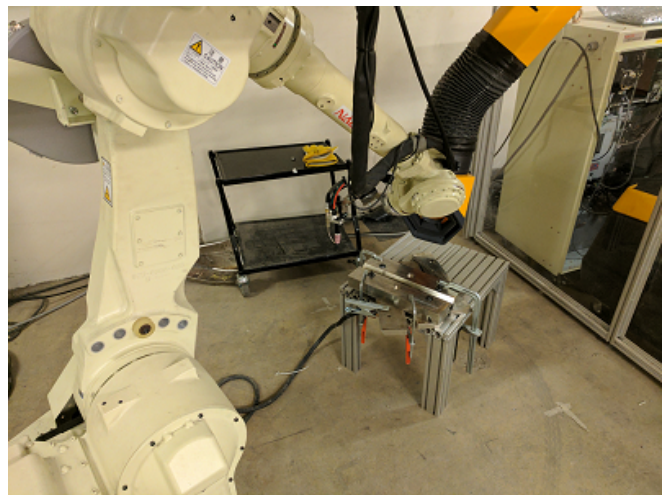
Lab set-up of the welding task. The welding robot is a NACHI MC70. The actual monitoring robot is not shown in this set-up.
